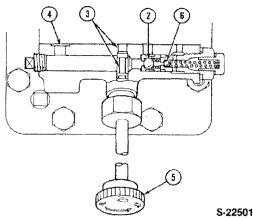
Flow Control Valve Assembly (Needle Valve Shown in Closed Position)
